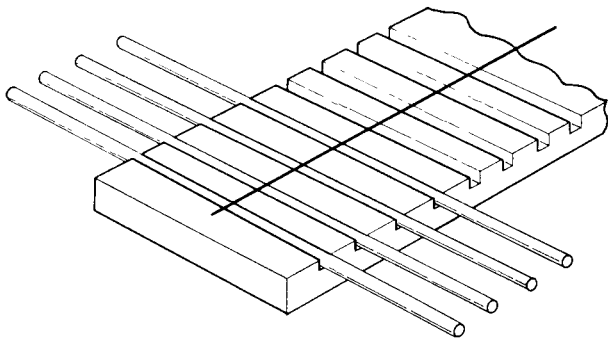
Mr. Briggs' slotted board makes an excellent soldering holder for the crossarms.
